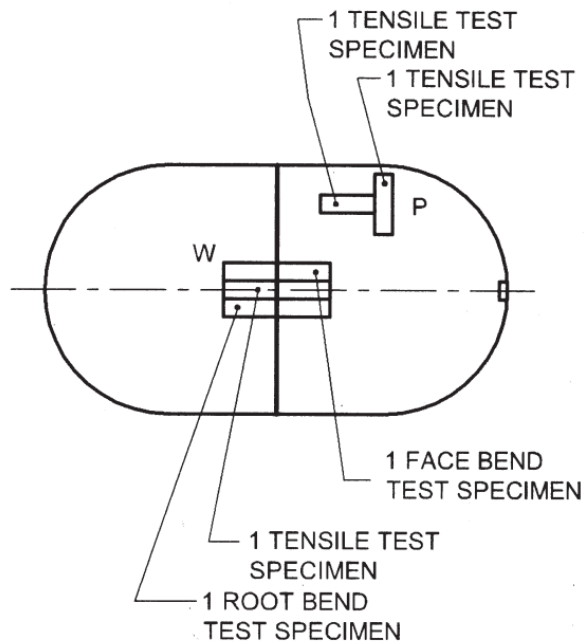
Layout of Test Specimen for Acceptance Test for Two Piece Cylinder
